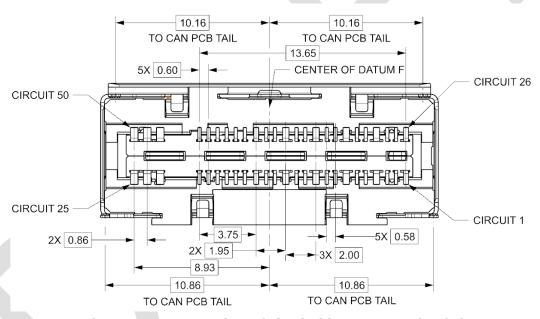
Bottom View of Fixed-Side Connector (2 of 2)
